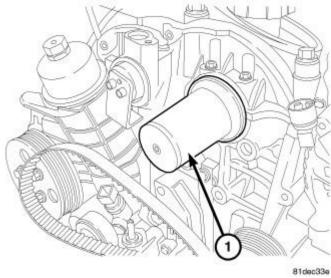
Camshaft Oil Seal Installer Courtesy of CHRYSLER LLC
